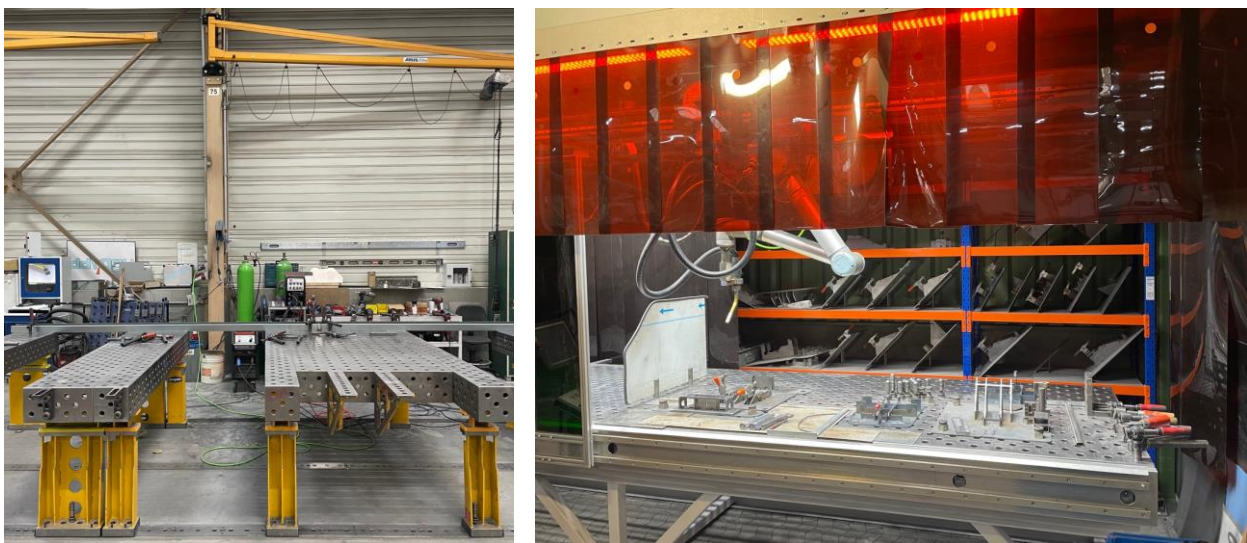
and 4: Workplaces for manual welding (left) and cobot welding (right) at the SME from case study 1
